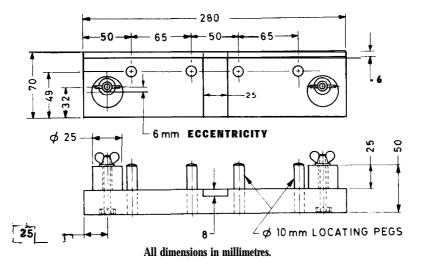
WOODEN JIG FOR LOCATING TEST PIECES IN CLAMP
